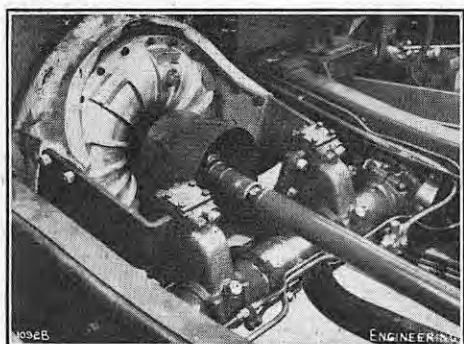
ENGINE BEARERS; DAIMLER LIGHTWEIGHT CHASSIS.
